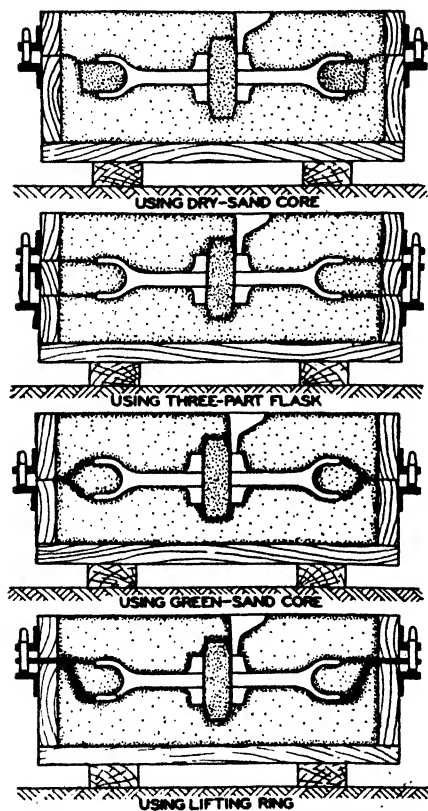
METHODS FOR MOLDING SHEAVE WHEEL
